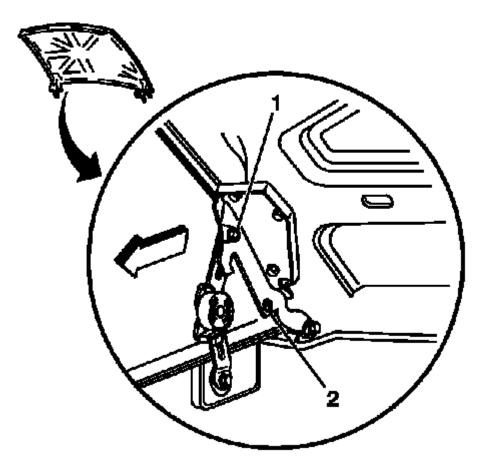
Identifying Hood Hinge Normal And Service Position Bolt Holes Courtesy of GENERAL MOTORS CORP.
